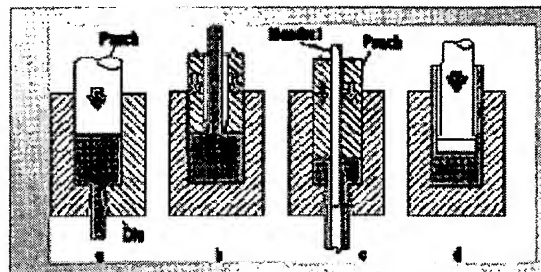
a-Forward extrusion; b-backward extrusion; c-tube extrusion; d-container extrusion.
